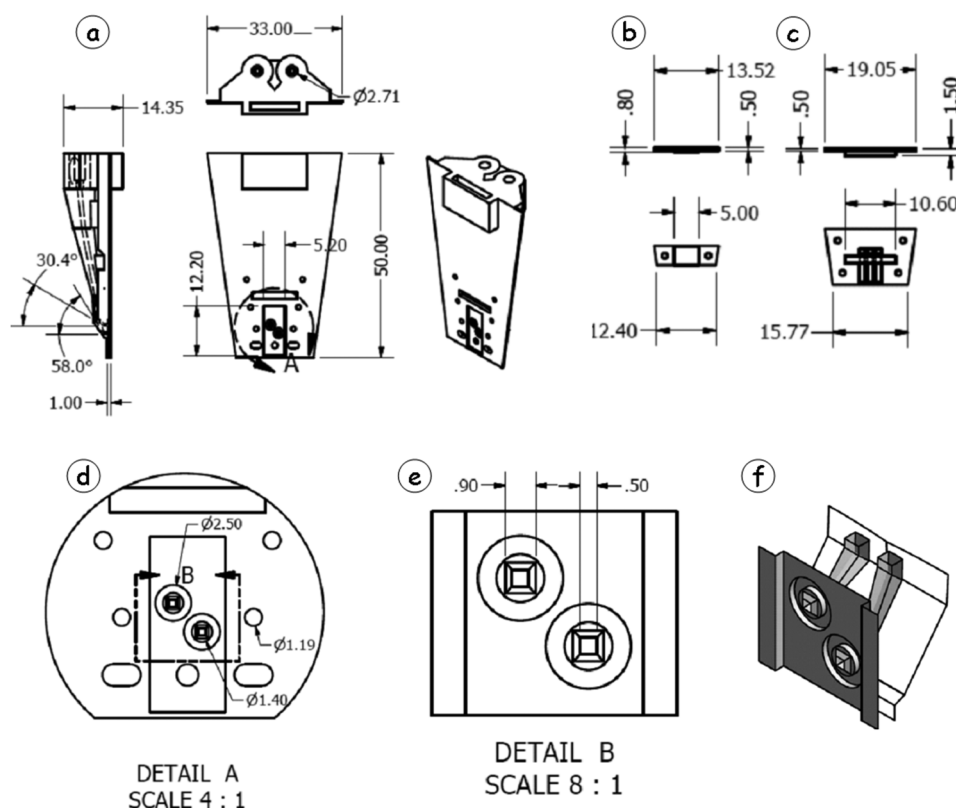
Design of the *in situ* flow cell 3D printed holder. (a) Overall design of all components. (b) Design of the keeper piece. (c) Design of the biasing piece. [(d) and (e)] Detail of o-ring sealed flow ports. (f) Isometric view of detail B (e).
